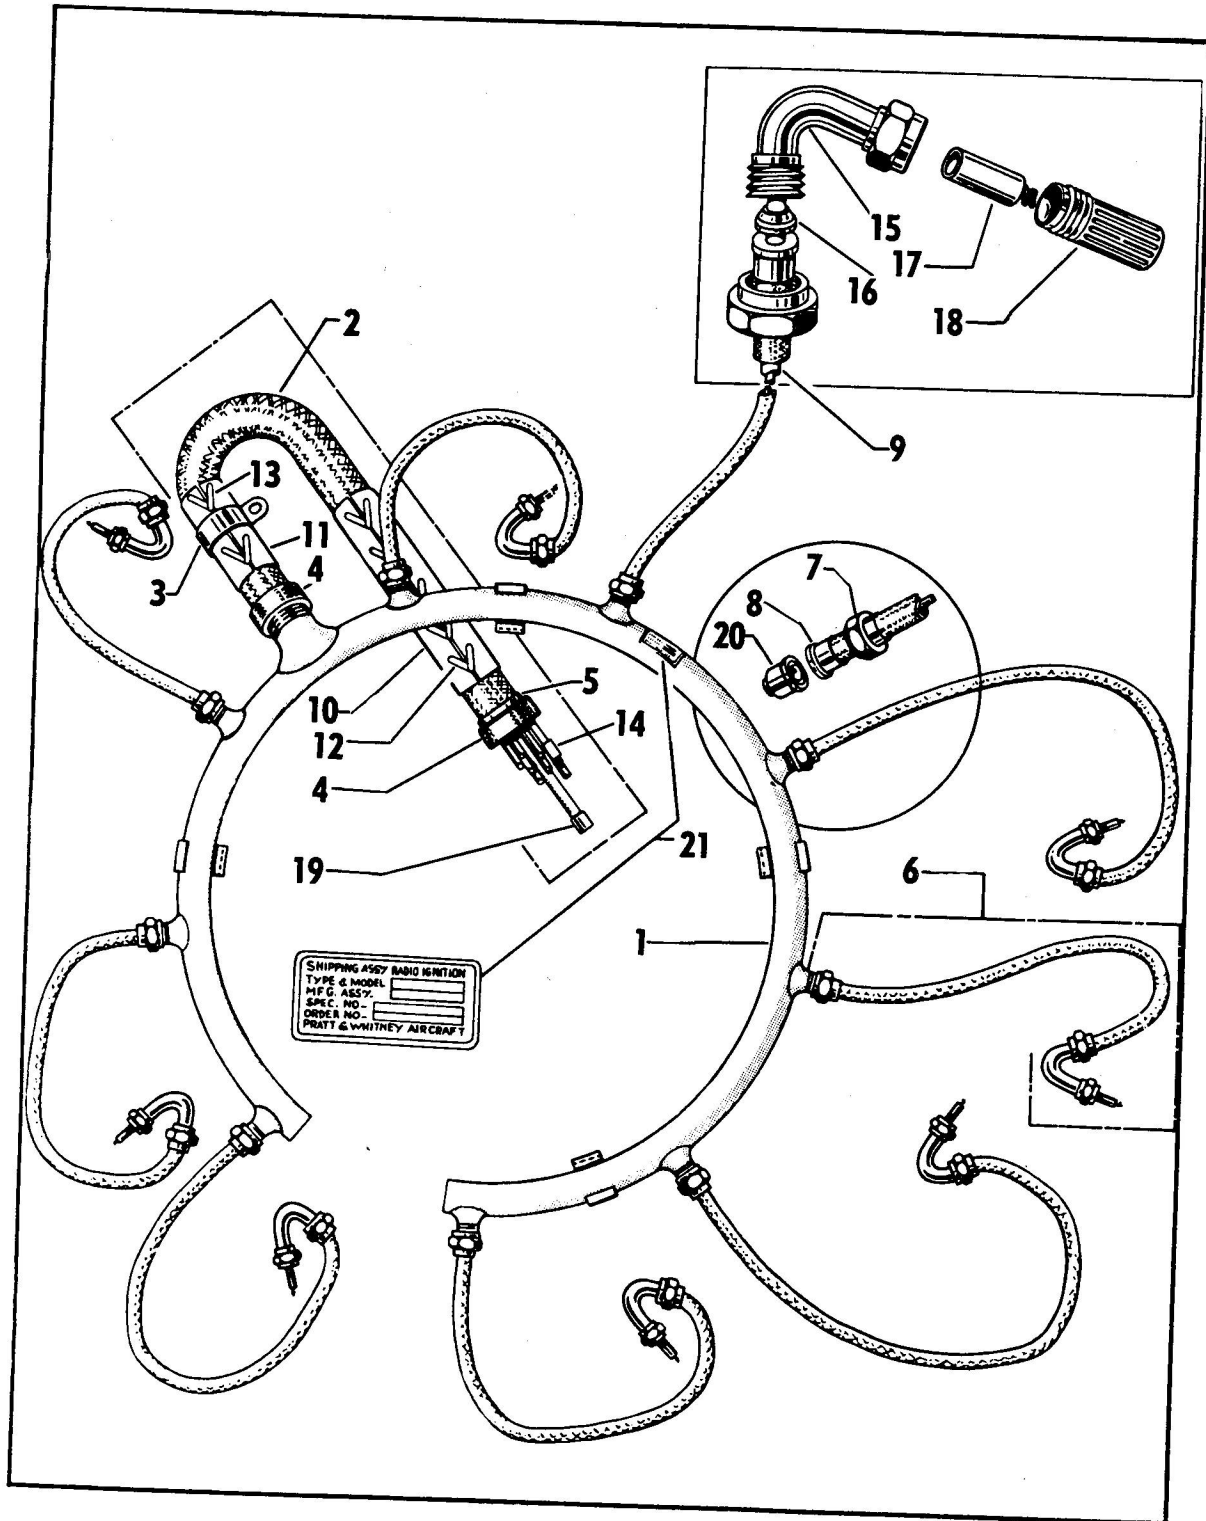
Ignition System - Front - R1340 (S1H2)
